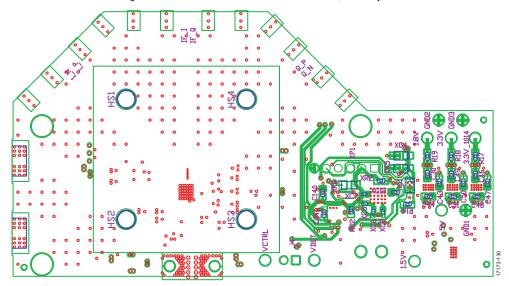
ADMV1014-EVALZ Evaluation Board PCB, Bottom Layer
